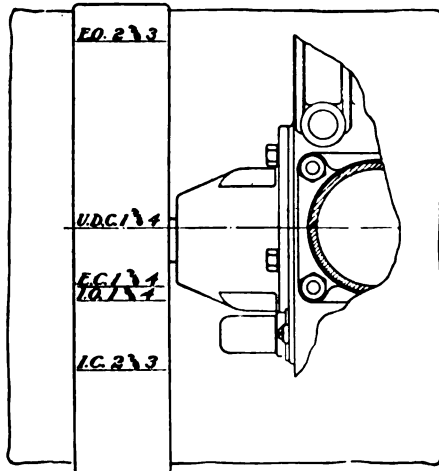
Markings on the flywheel to indicate the opening and closing of the valves
